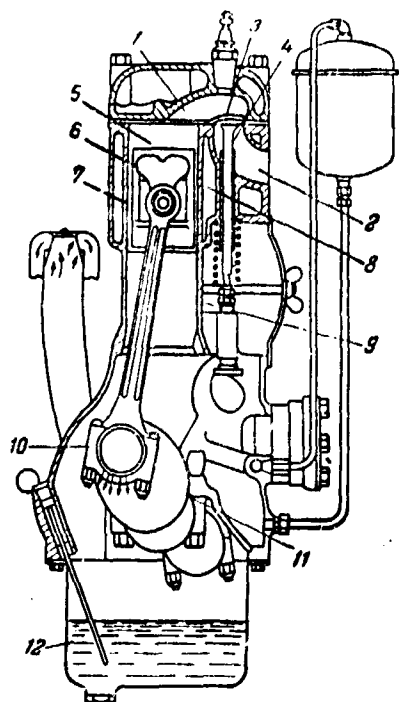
Typical running temperatures in carburetor engine [12]: 1) combustion chamber 2200-2480°C; 2) exhaust gases 540-870°C; 3) exhaust valve head 425-815°C; 4) exhaust valve stem 150-540°C; 5) head of piston 205-425°C; 6) piston-ring zone 150-315°C; 7) piston skirt 95-205°C; 8) cylinder wall (top) 95-370°C; 9) cylinder wall (bottom) 10-150°C; 10) connecting-rod bearings 95-205°C; 11) main bearings 65-175°C; 12) crankcase oil 35-150°C.
